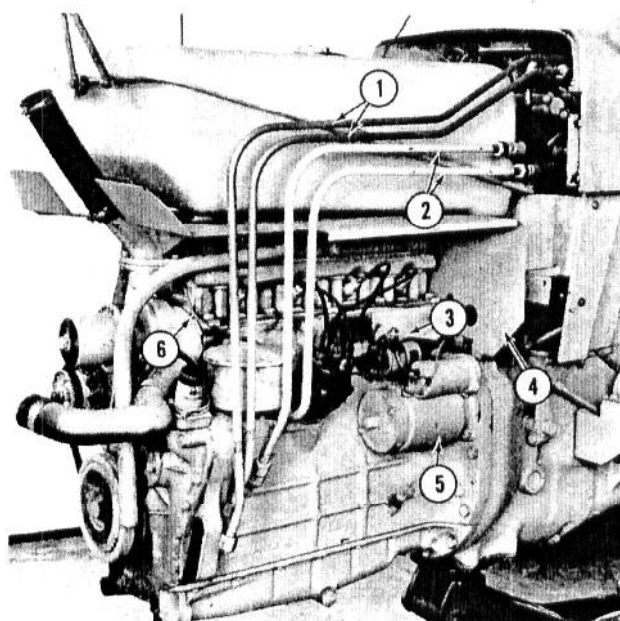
LEFT-HAND VIEW OF GAS ENGINE SEPARATED FROM FRONT AXLE SUPPORT
